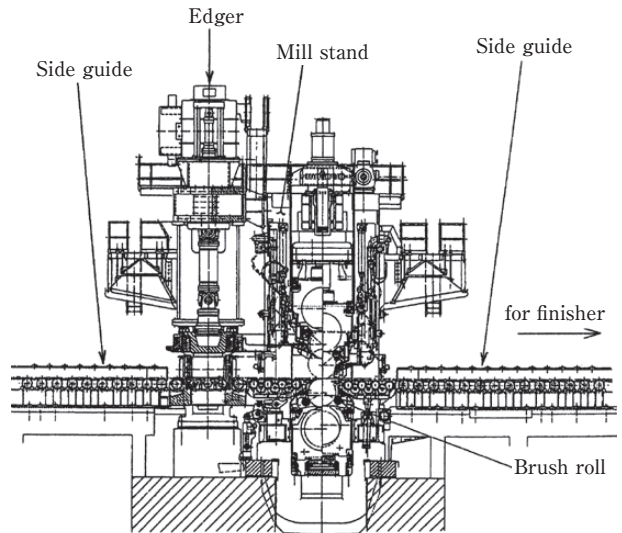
Hot rolling rougher mill (4 Hi-reversible mill)<sup>19)</sup>.
